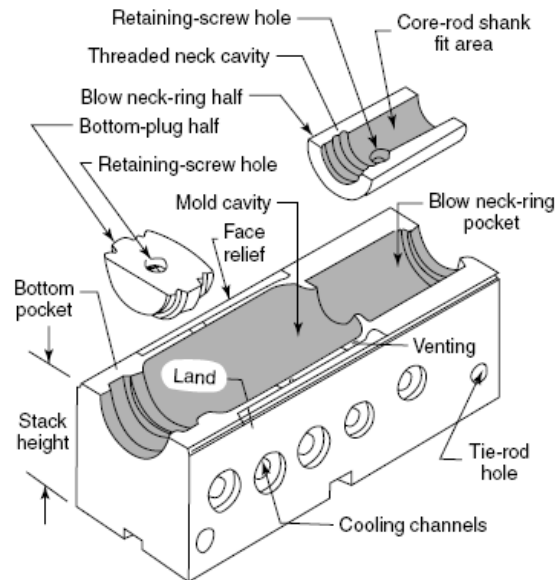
Exploded view of one-half of an injection blow mold, with details of bottom plug and neck ring.
